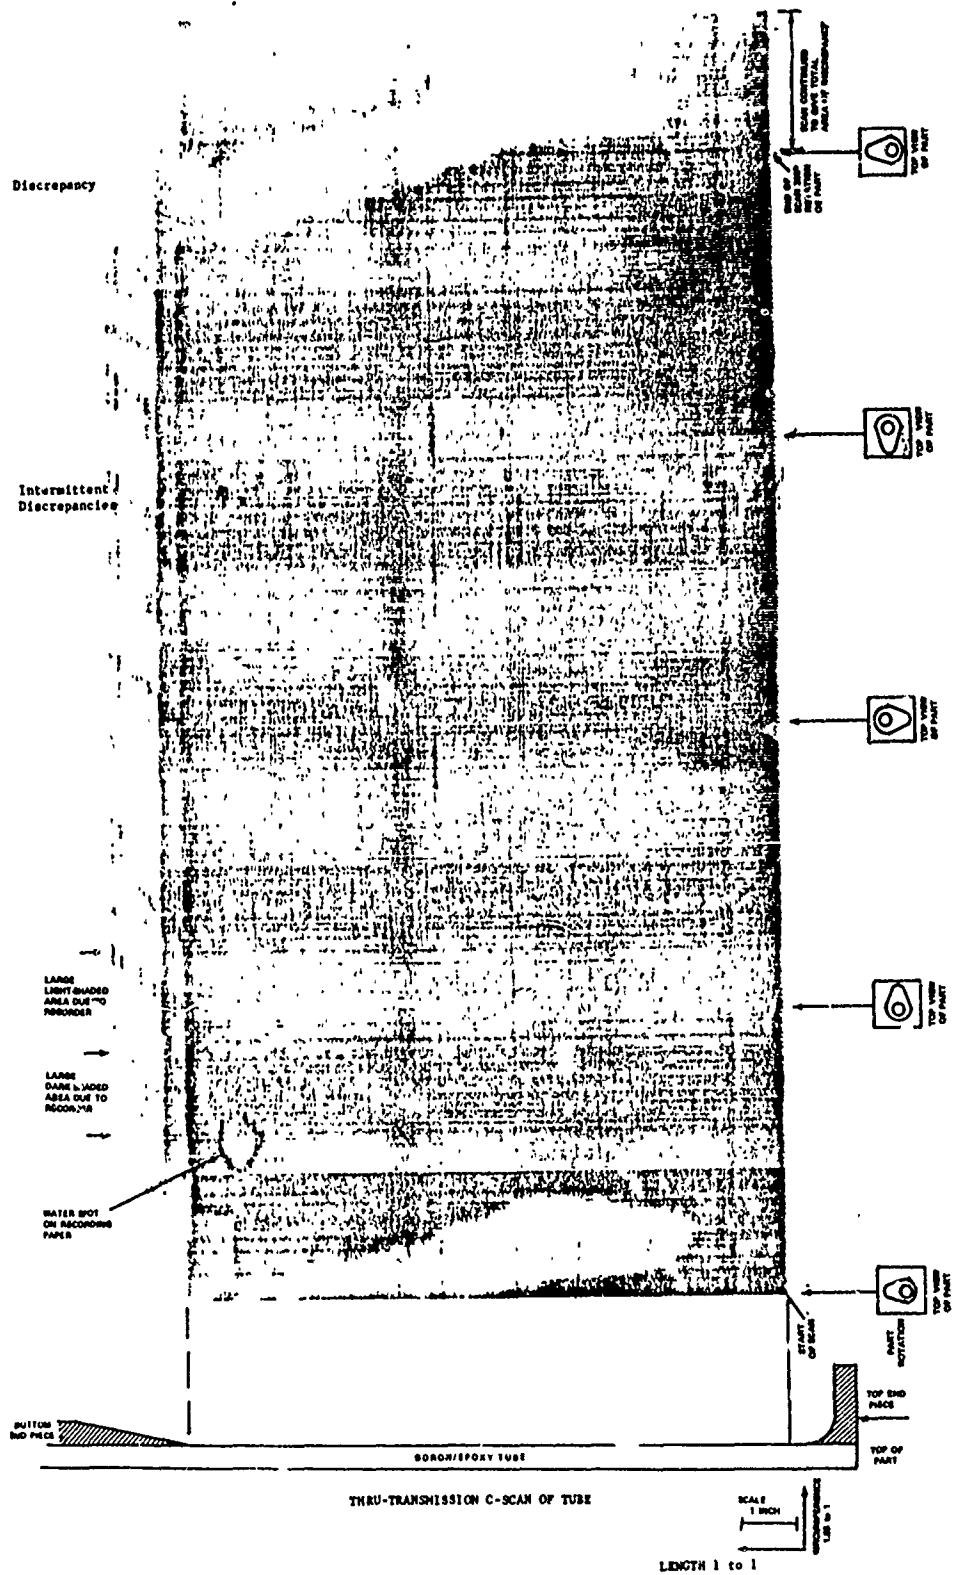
C-Scan Inspection of Forty-Eight-Ply Tube
